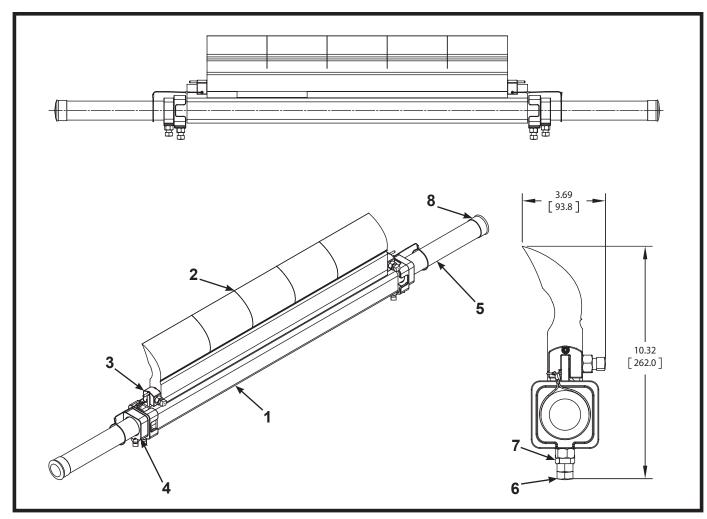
Martin® QC1+TM Cleaner PV, P/N C1QCP3SXXSXXXXXX
